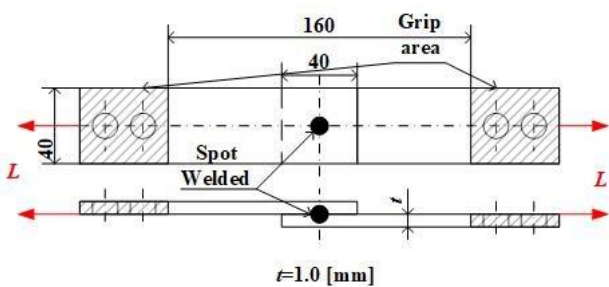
Spot-welded joints used for fatigue testing under tensile shear
